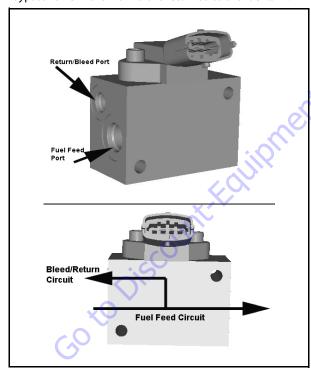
Gasoline Fuel Pressure and Temperature Manifold Assembly
